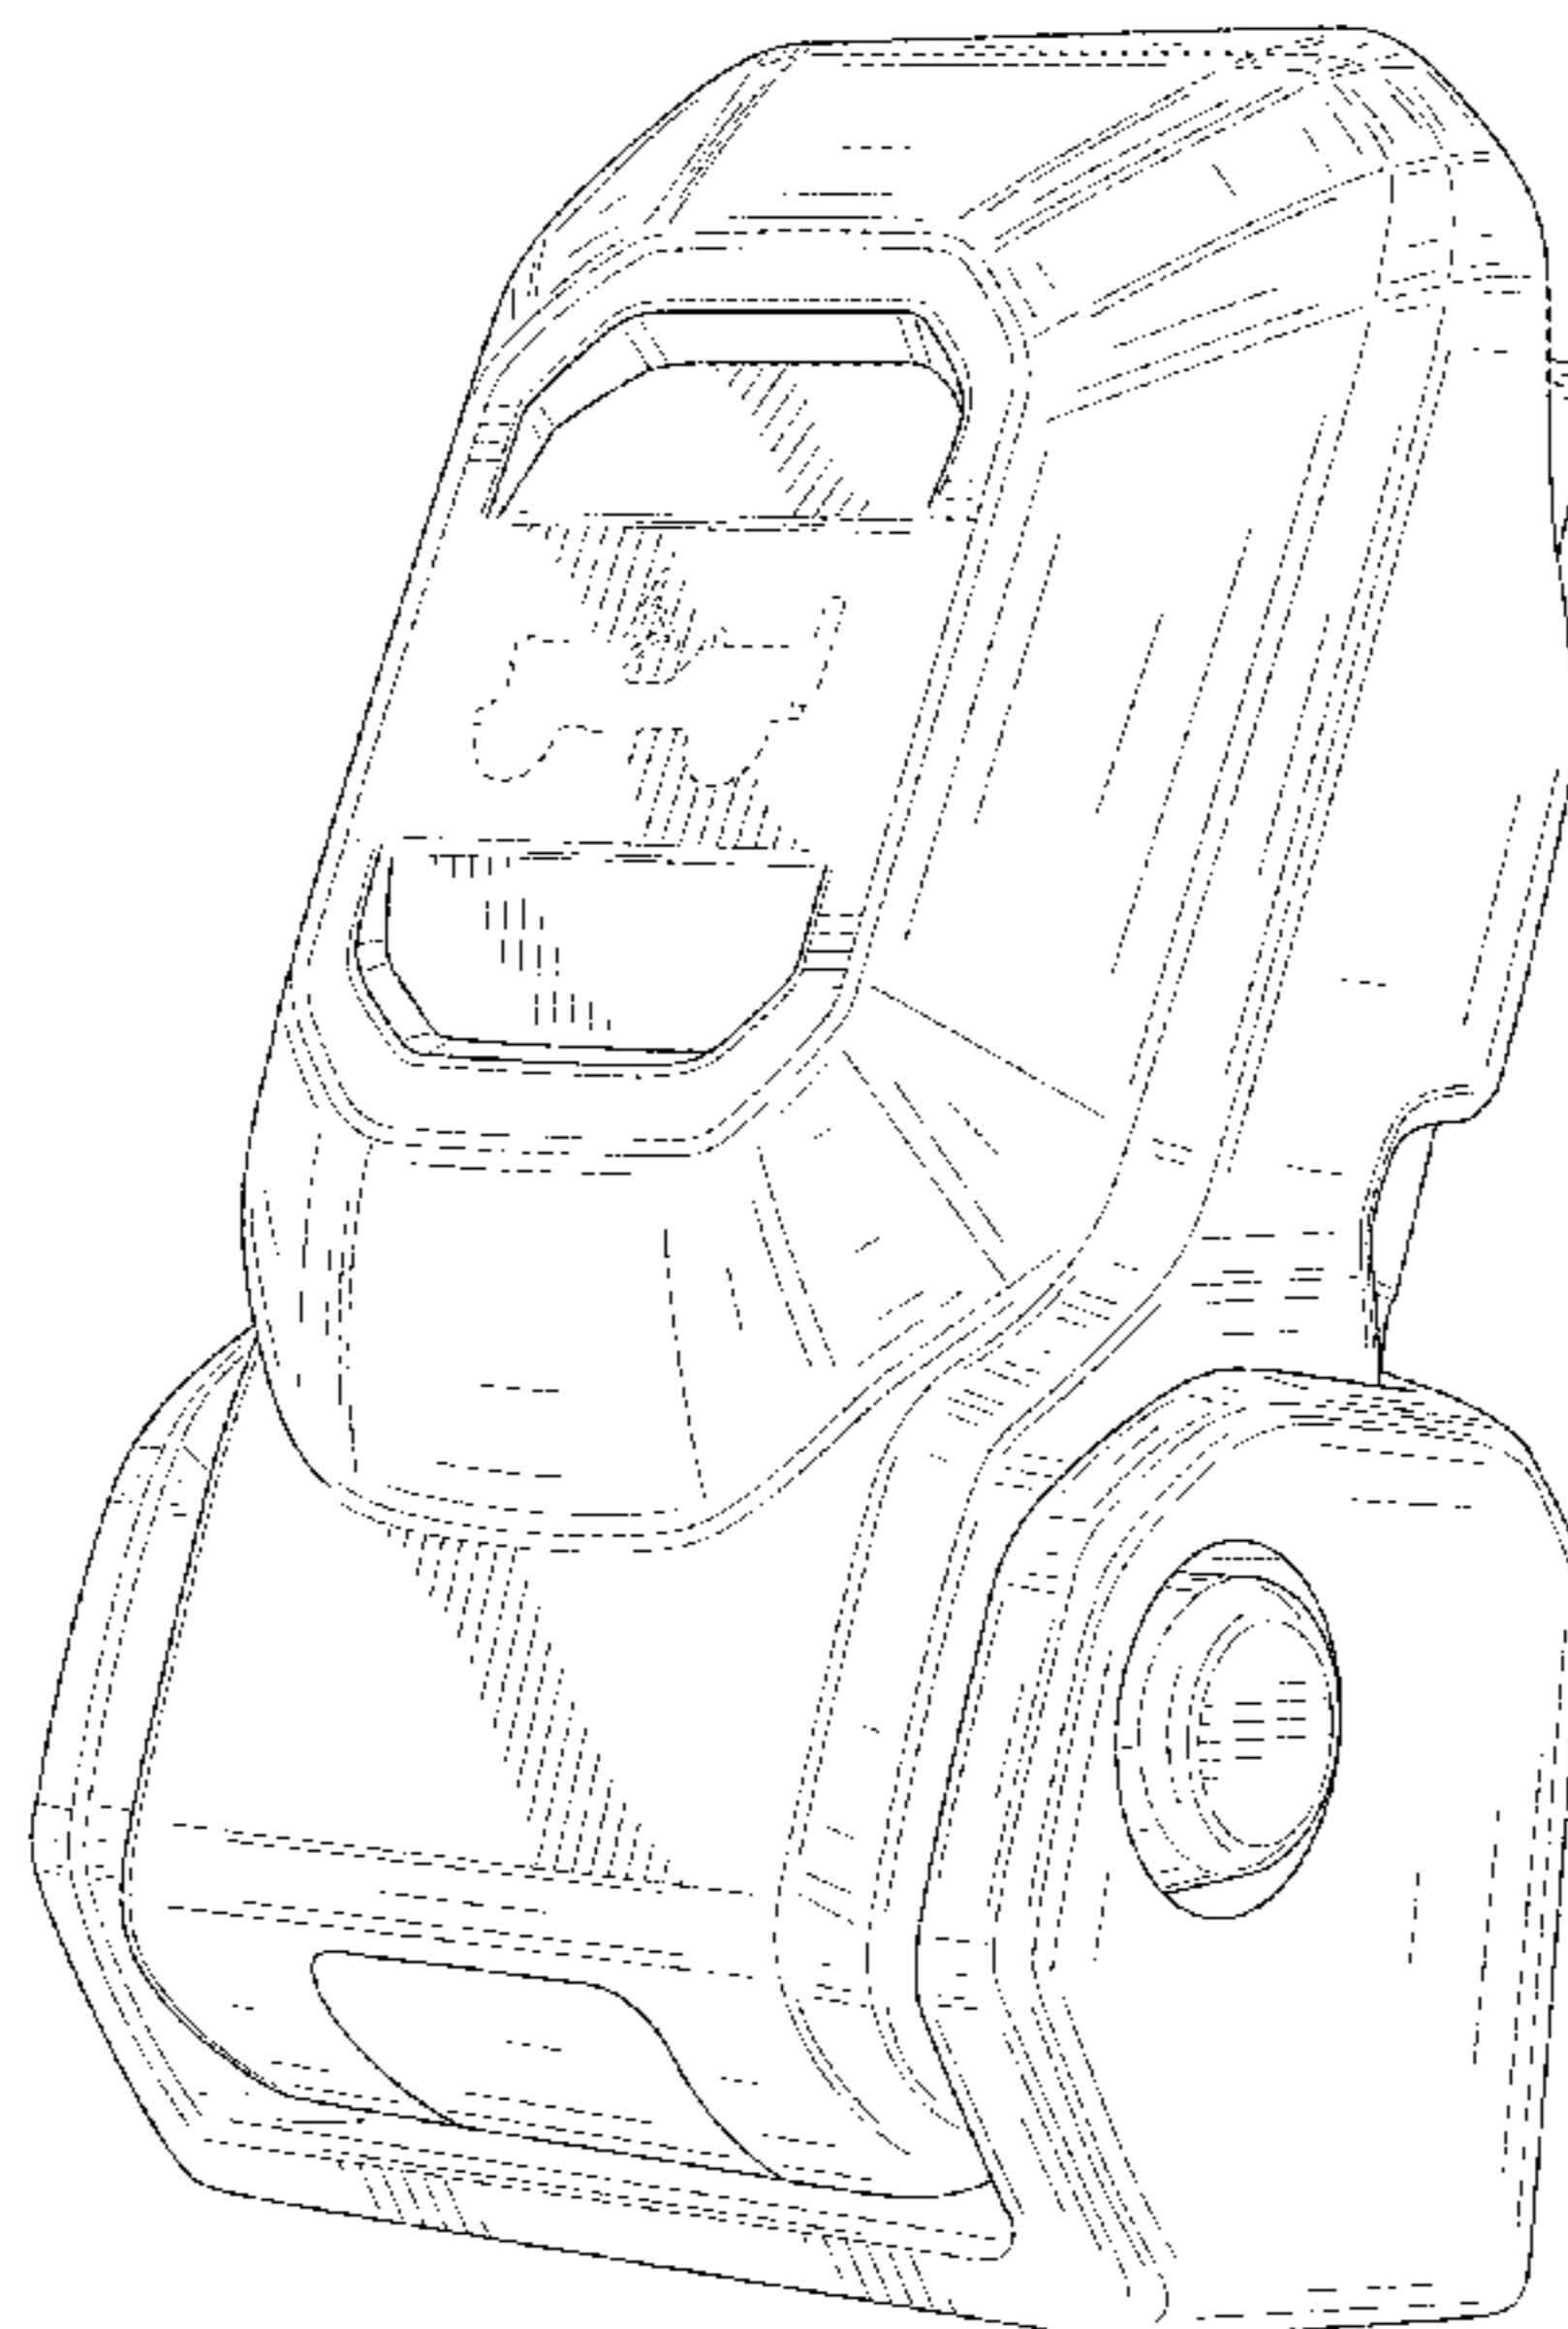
is a left side front perspective view of a hood latch showing our new design;
